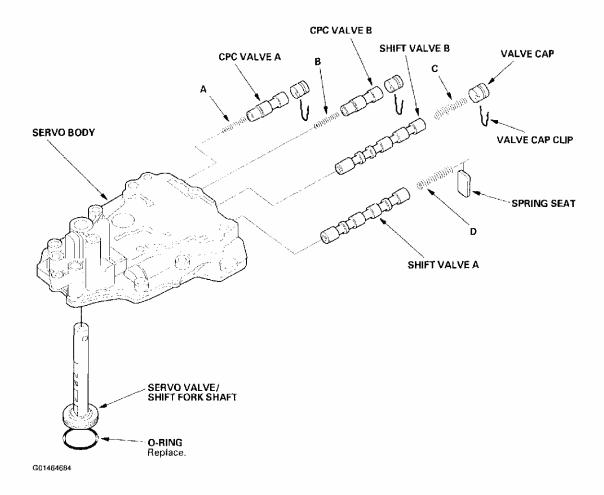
Exploded View Of The Servo Body Courtesy of AMERICAN HONDA MOTOR CO., INC.
